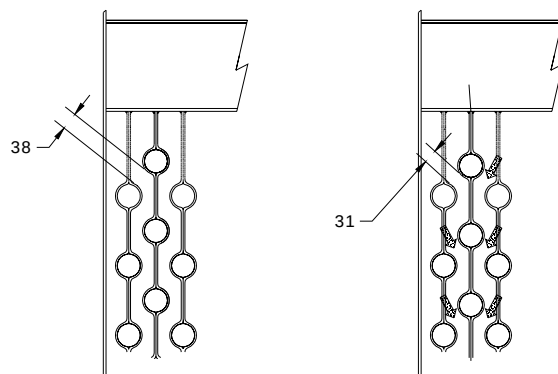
STAGGERED PITCH WITH WELDED SUPPORTS -
